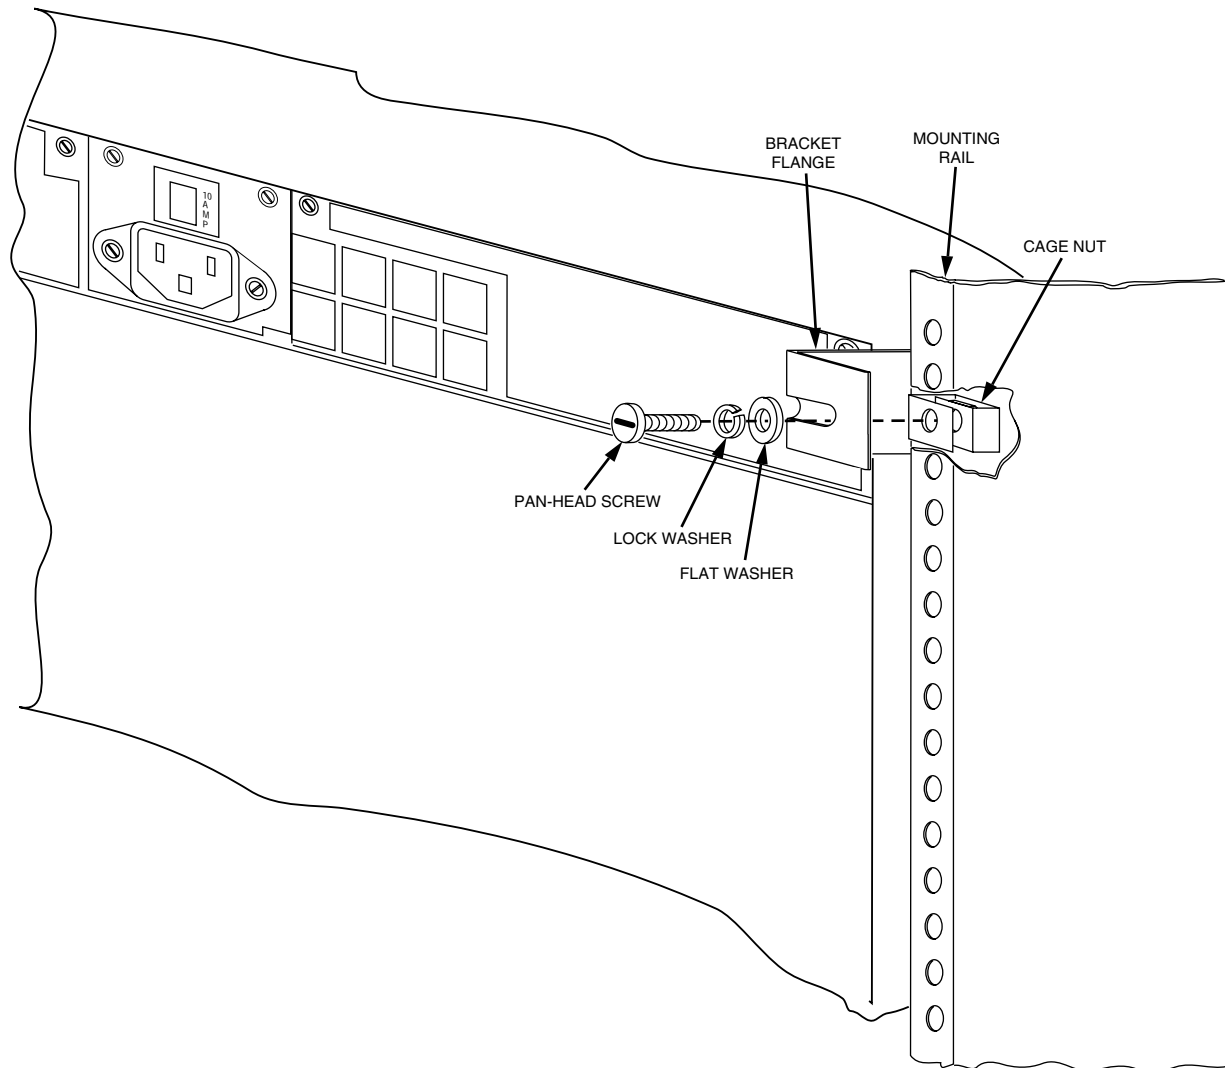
Attaching Rack Mount Brackets to Cage
